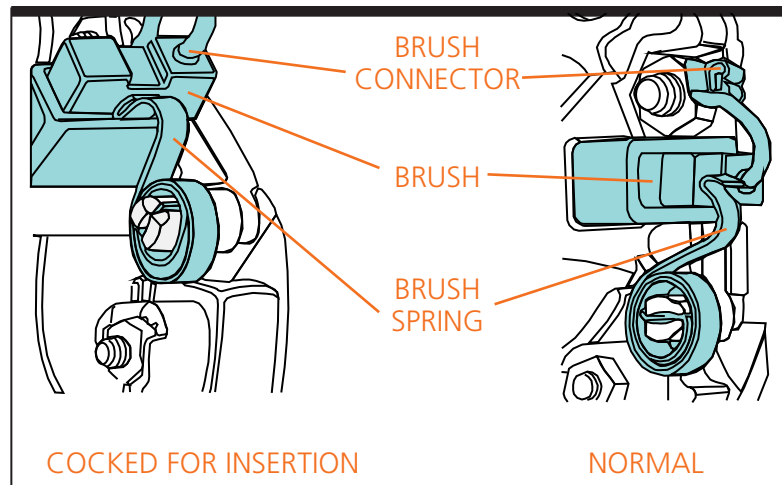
DC Motor Brushes with Gasketed Cover Removed
